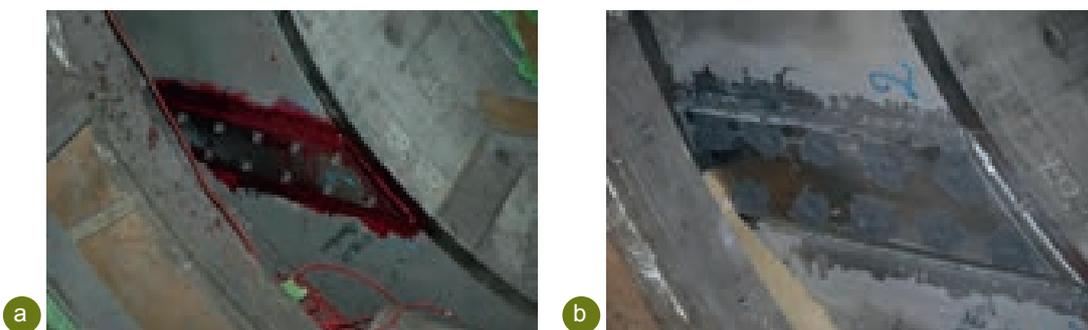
(a) Checking the welds on the assembly plate using a penetration product; (b) The welds are passivated and the holes for the bolts in the assembly plates are filled with a resin.
